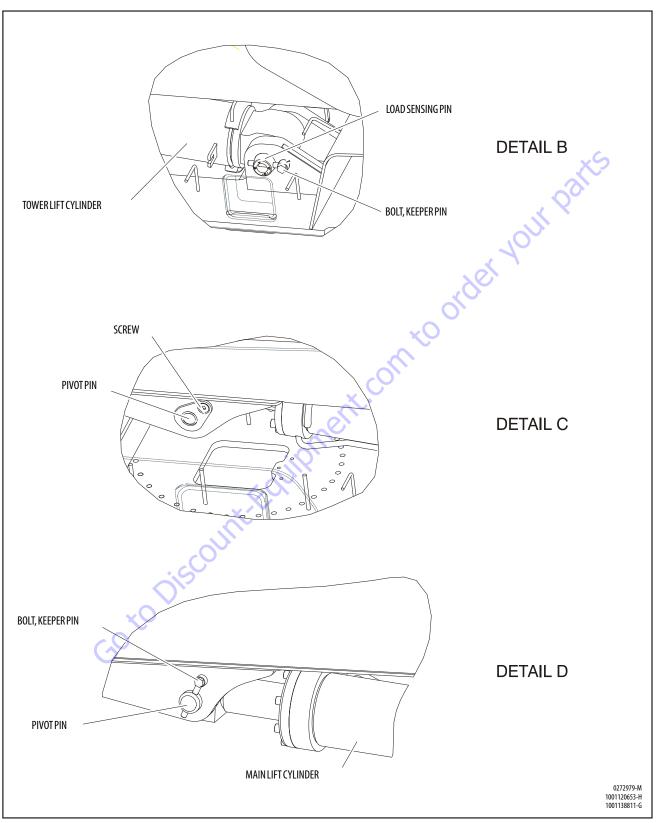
Boom & Cylinder Installation - Sheet 2of 4
